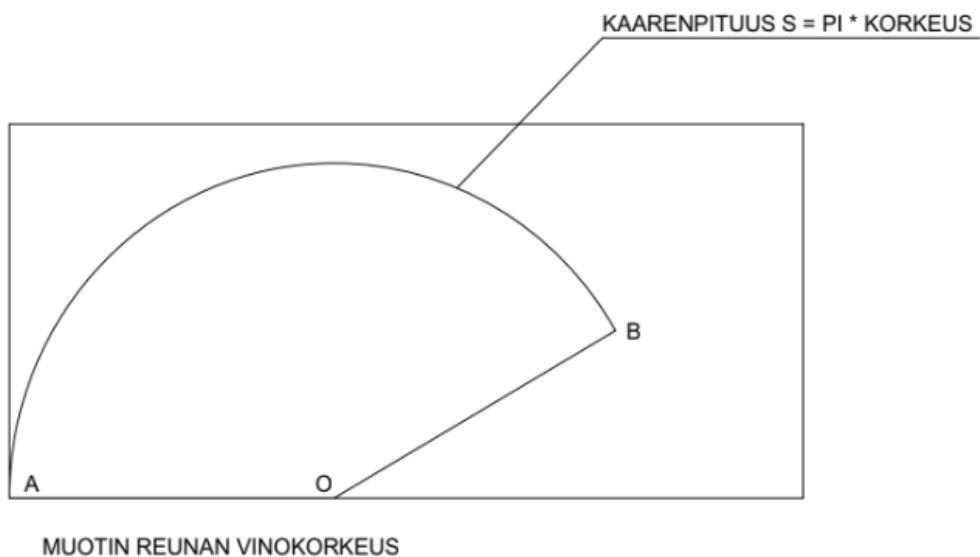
Basic drawing of cutting a cone-shaped mould (Riikonen 2009)
